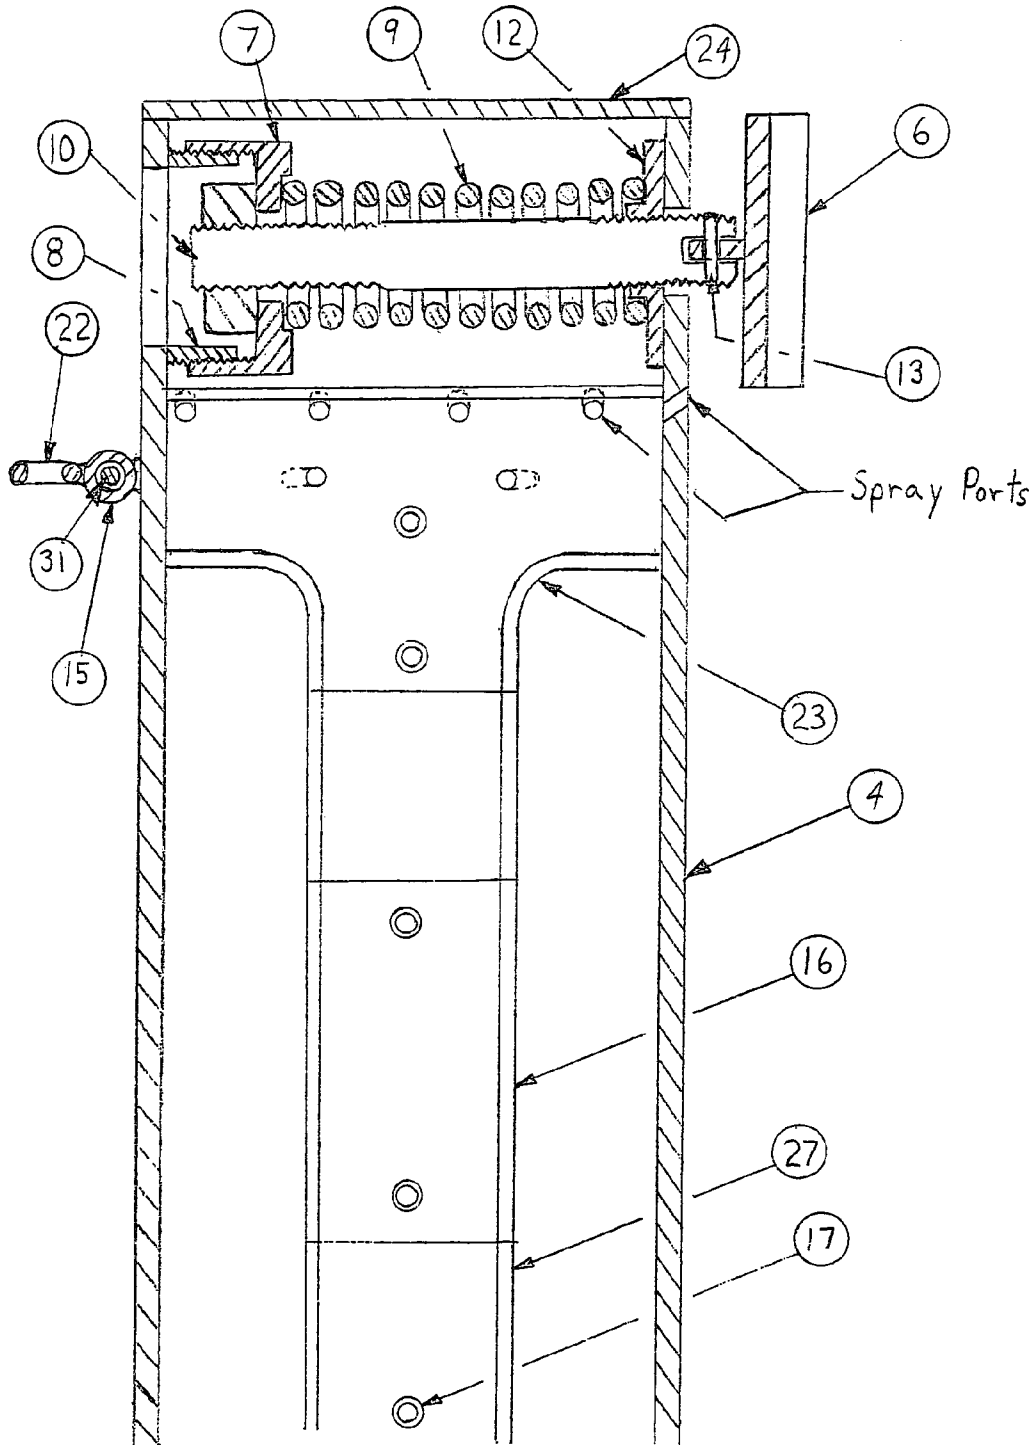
Section View CC Stop Log Slot Cleaning Machine
